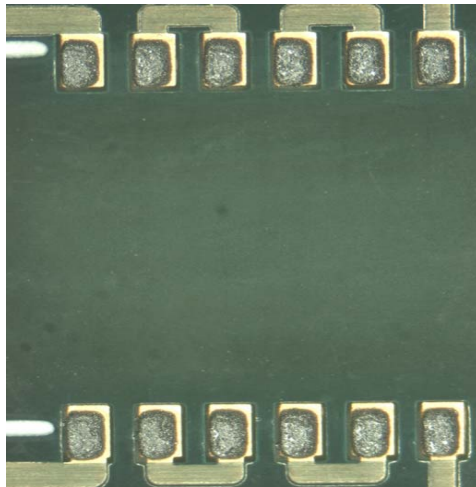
Solder paste on PCB land pads (Note: In this photo the solder pads are not extended).
